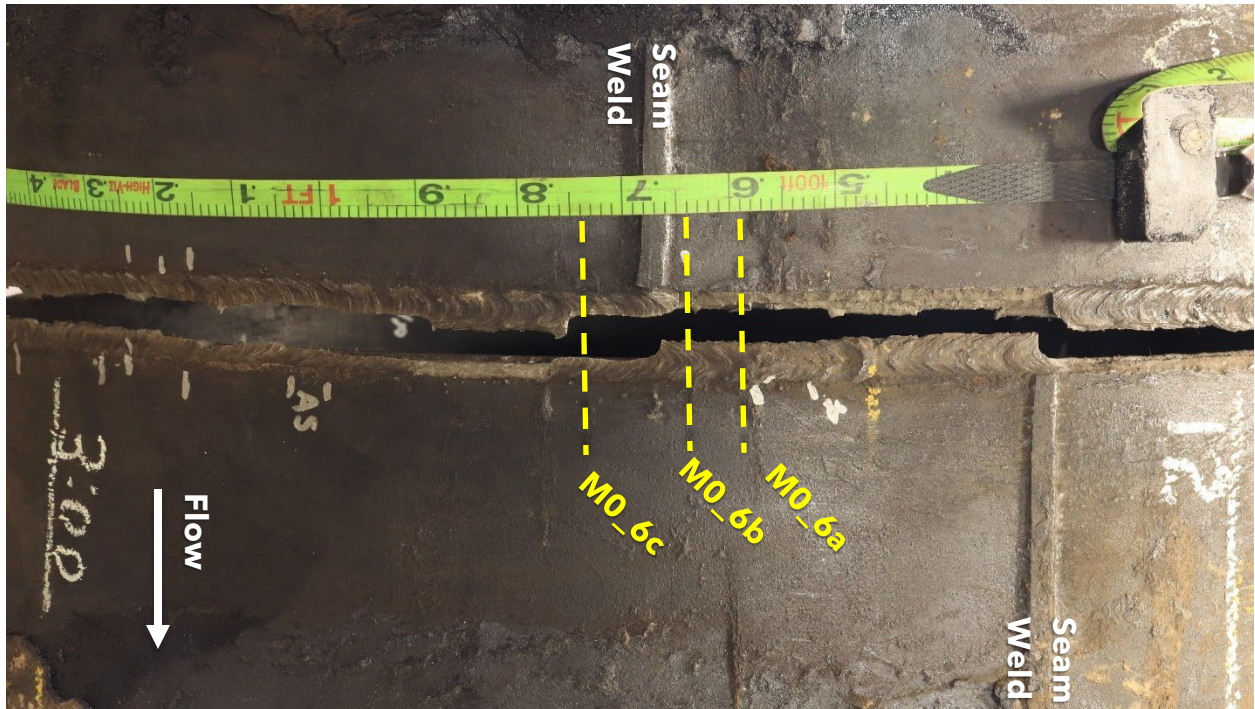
View of the mating fractured of Pipe 1 and 2 between the 3 and 12 o'clock position, showing a seam weld and the location of metallographic mount locations M0\_6a, b, and c.
